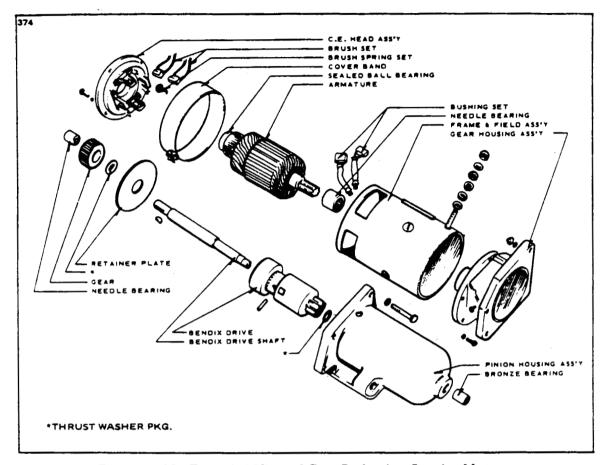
Exploded View of Gear Reduction Starting Motor
